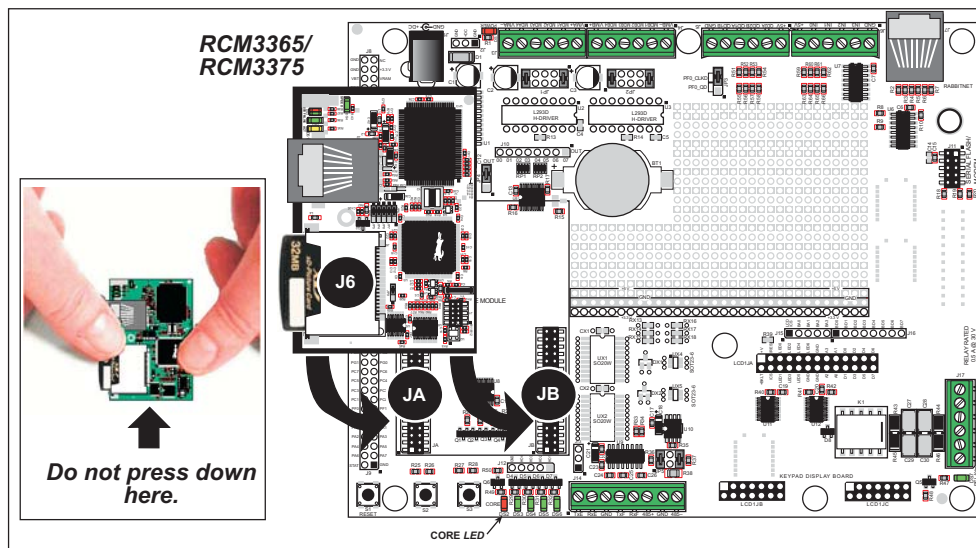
Install the RCM3365/RCM3375 Module on the Prototyping Board
